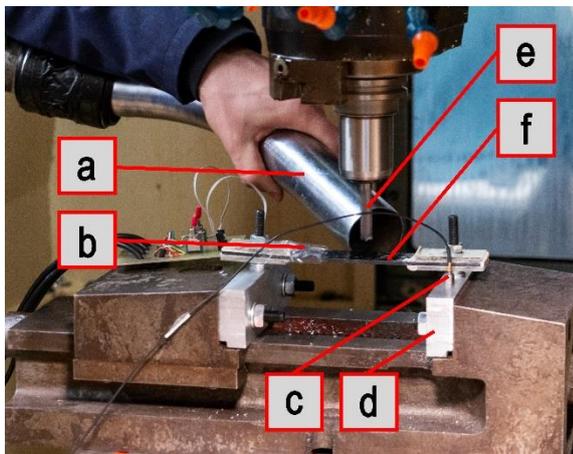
Experimental setup: (a) vacuum cleaner (b) strain gauge (c) accelerometer (d) fixture jaw (e) drilling tool (f) UD-CFRP specimen
